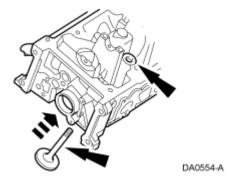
Installing Valve Courtesy of FORD MOTOR CO.
